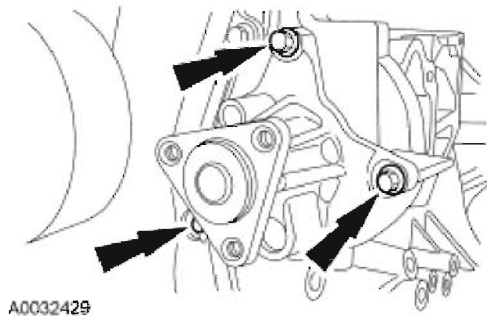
Locating Bolt & Accessory Drive Belt Idler Pulley
